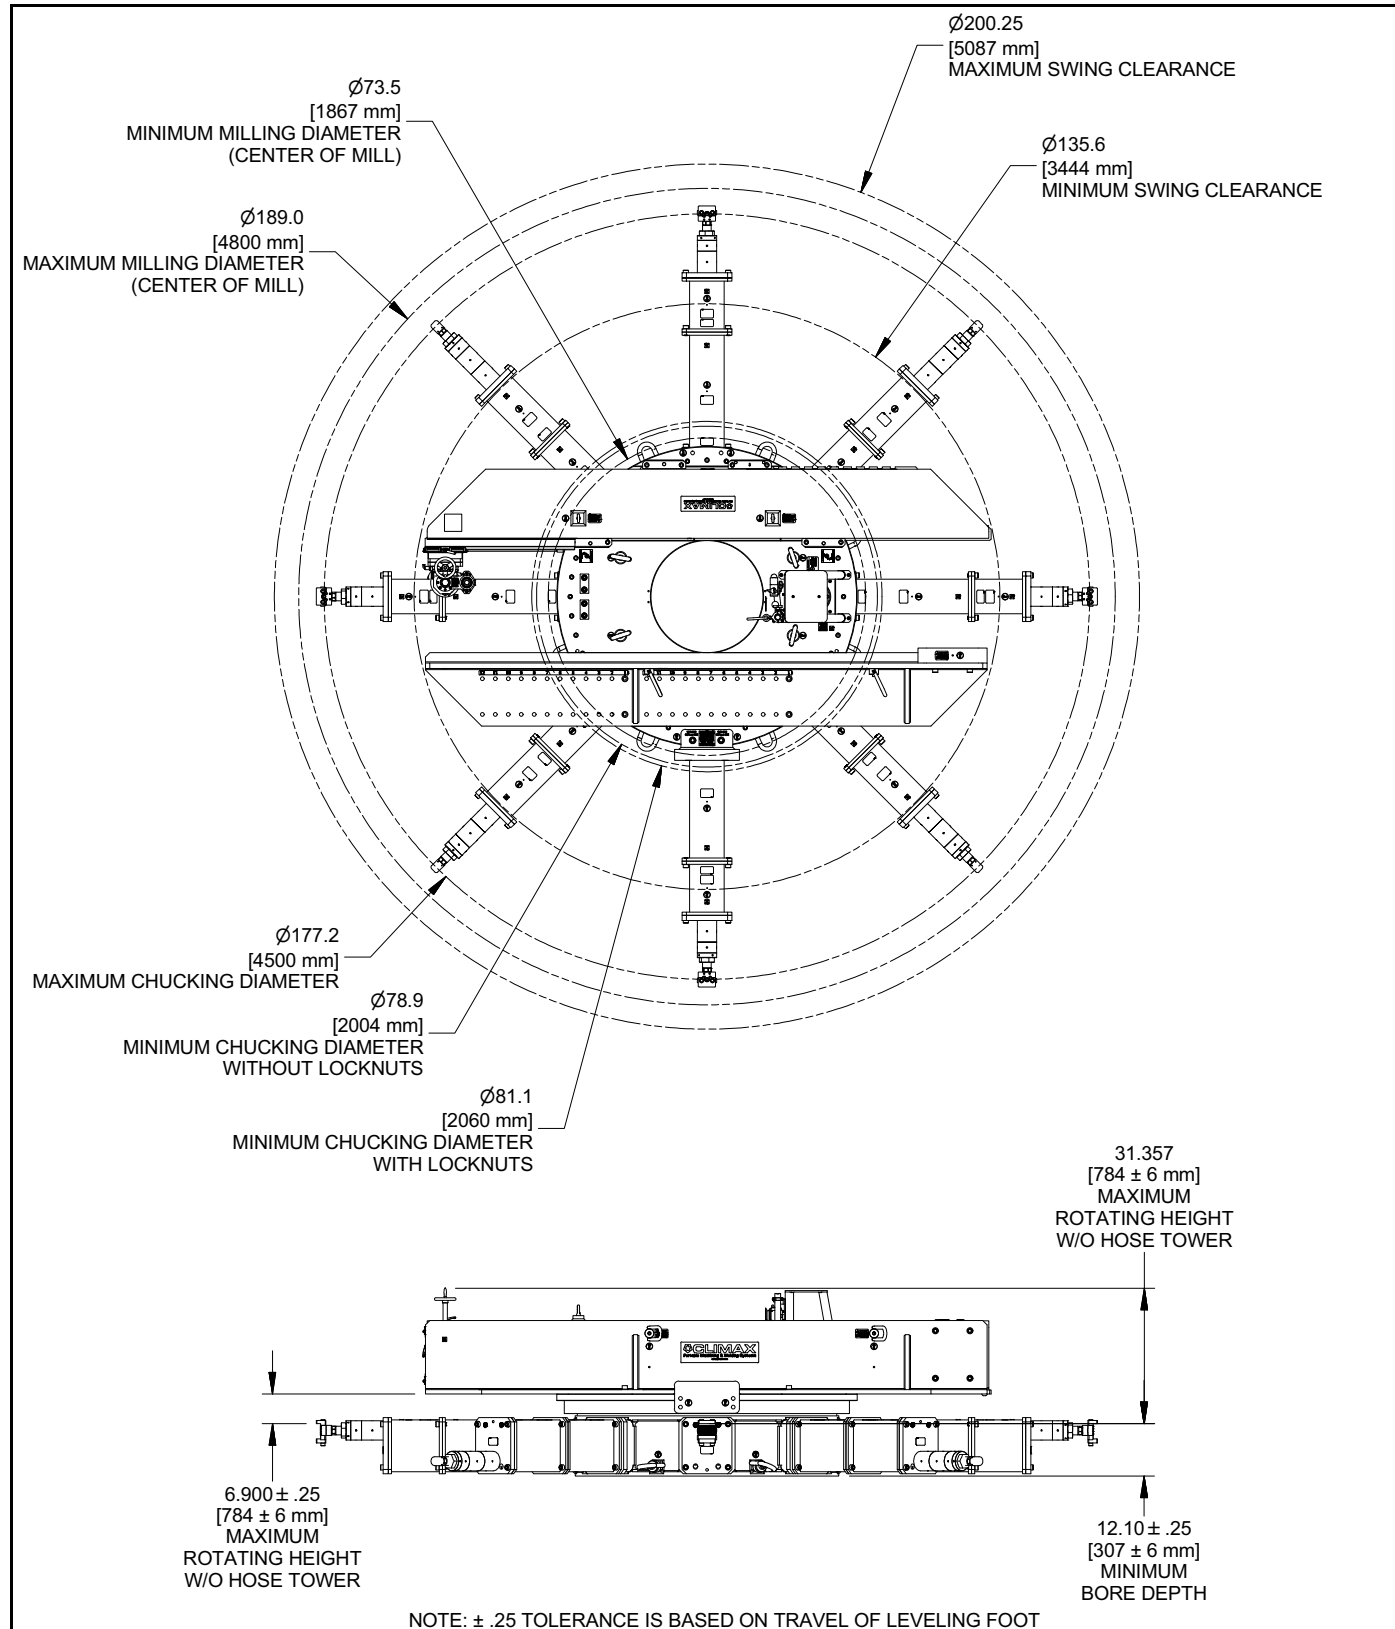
ID MOUNT MACHINE DIMENSIONS
